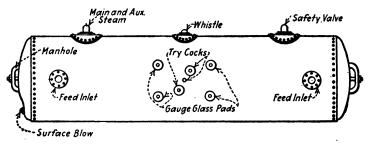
Front View of Steam Drum Showing External Fittings B. & W. Boiler
